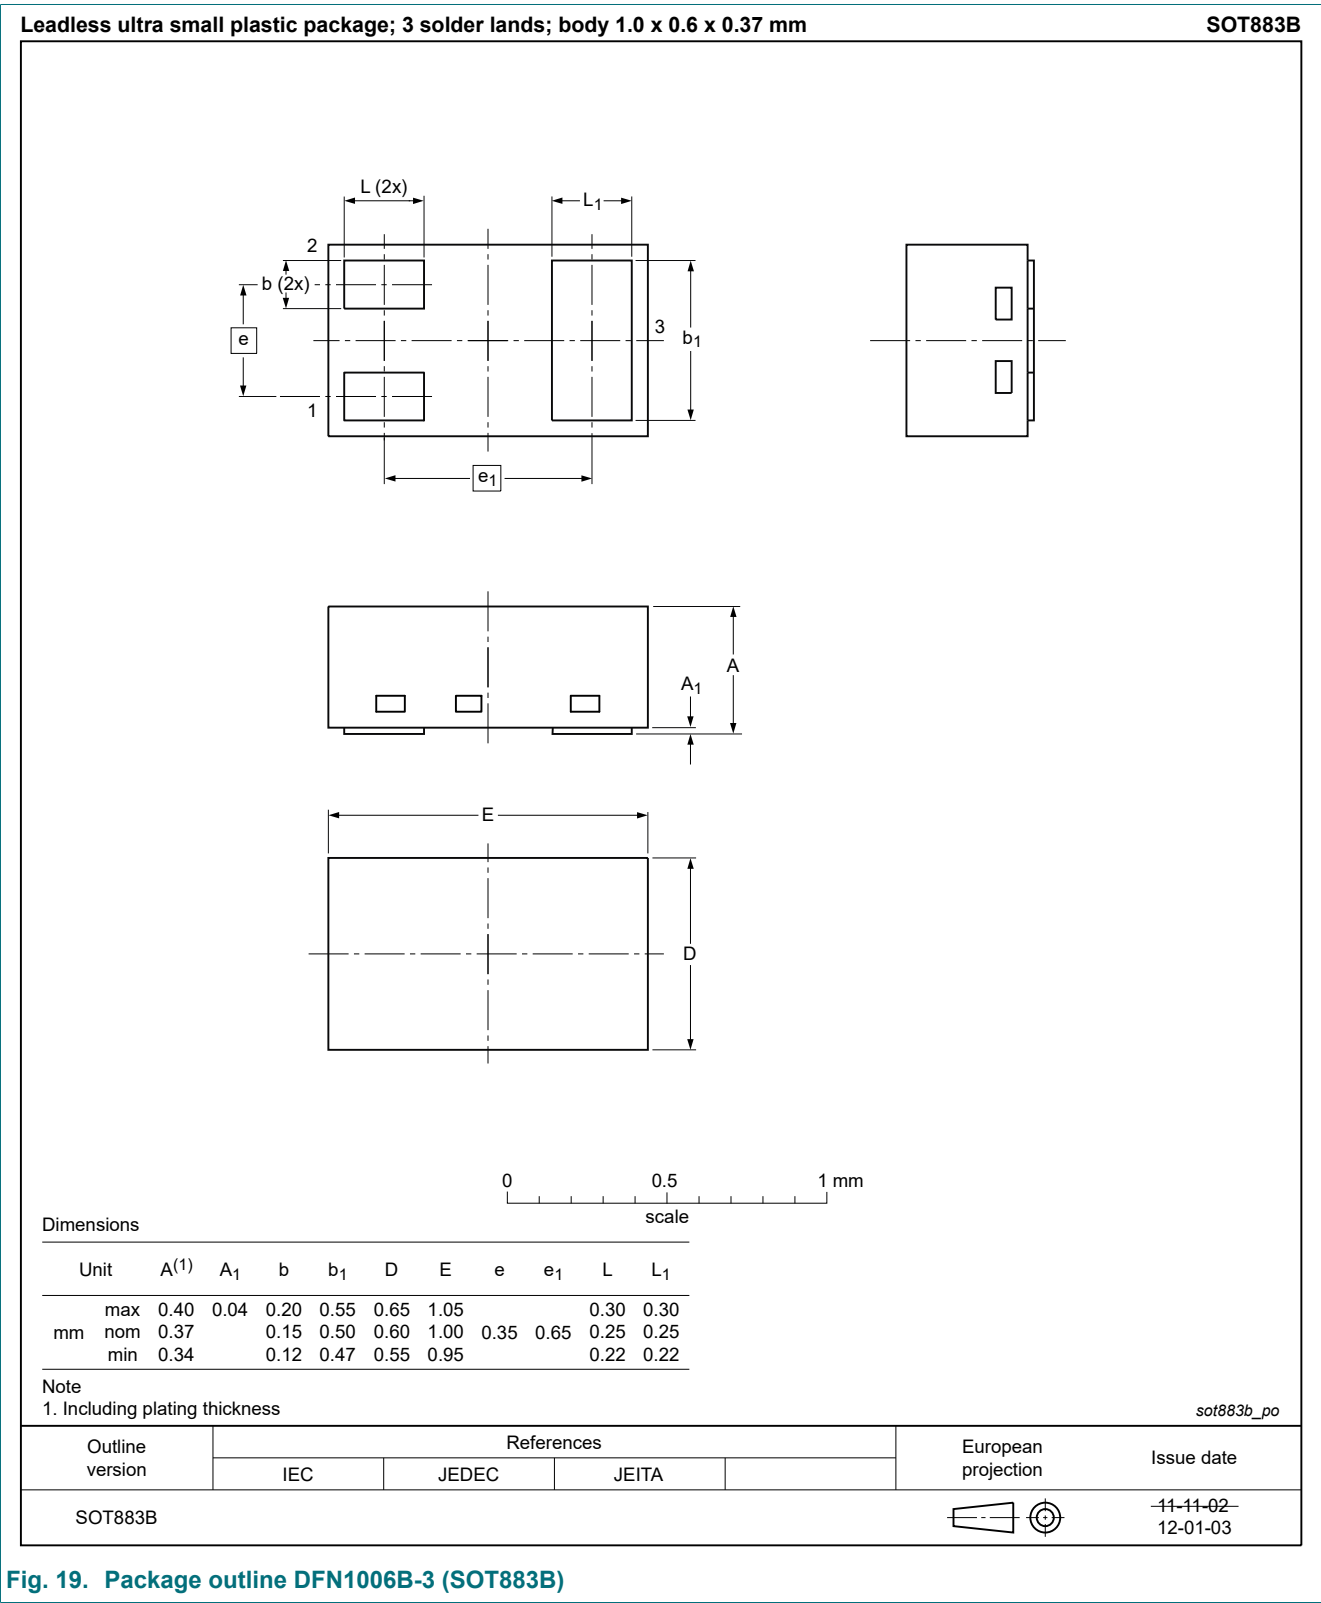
Package outline DFN1006B-3 (SOT883B)
